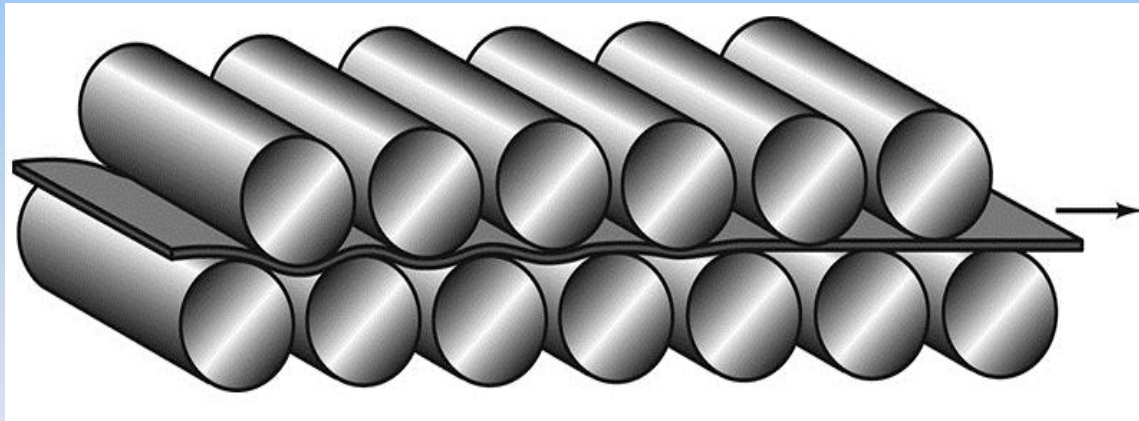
Method of straightening rod or sheet by passing it through a set of straightening rolls. For rods, another set of rolls is used to provide straightening in the transverse direction.
